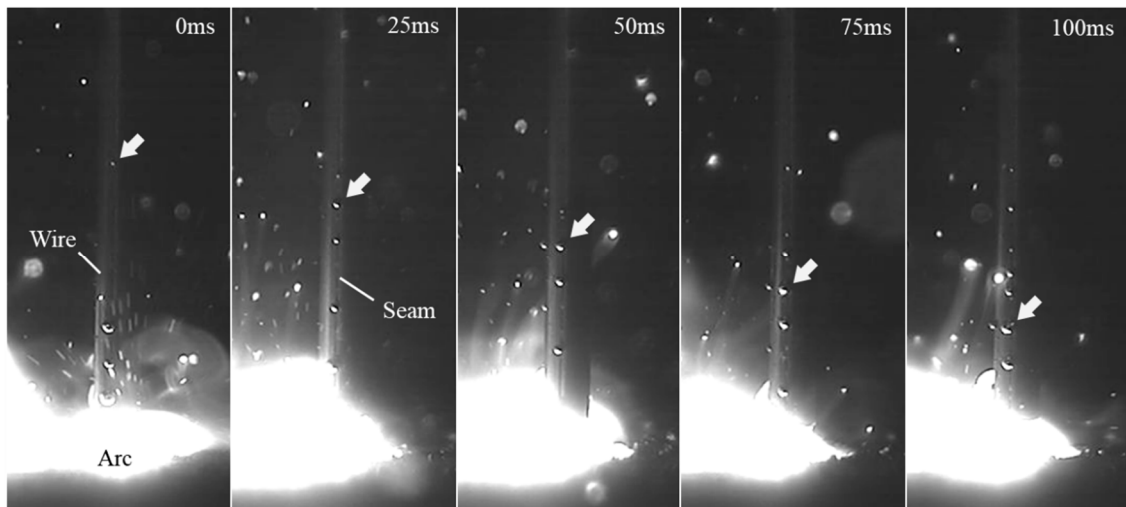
Series of high-speed-video images of the designated wire extension part of FCAW
